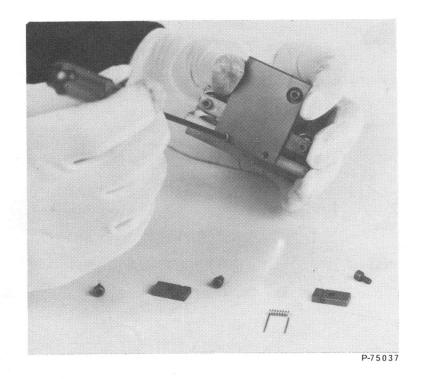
Continue from step \underline{c} for total disassembly. Remove the two screws holding the anode on the mounting bar.
